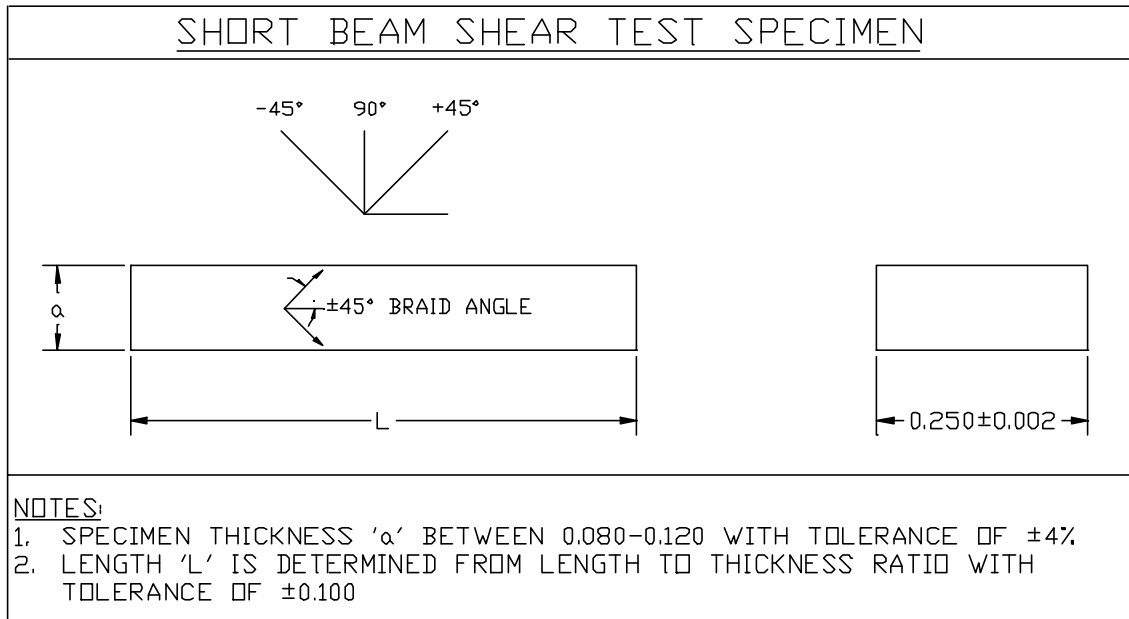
±45° Braid Angle Short beam shear strength specimen.
